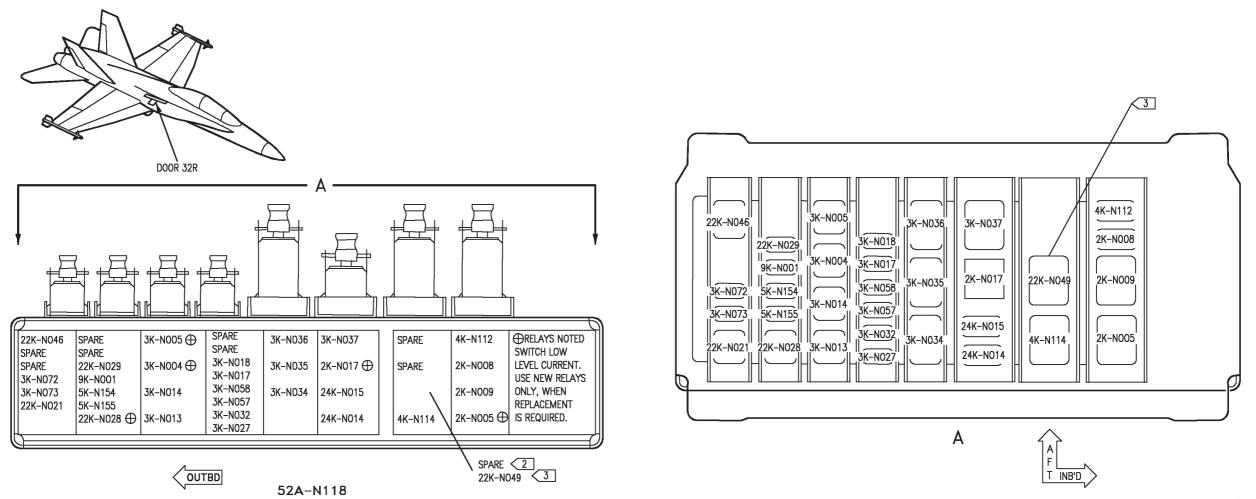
No. 4 Relay Panel Assembly - 52A-N118 (Sheet 1)
